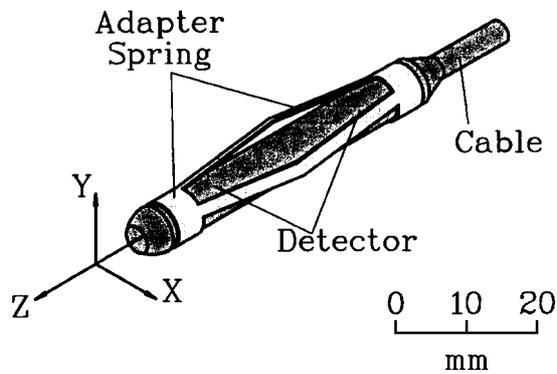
Modified in-core accelerometer CA607 with adapter spring for use in BWR
